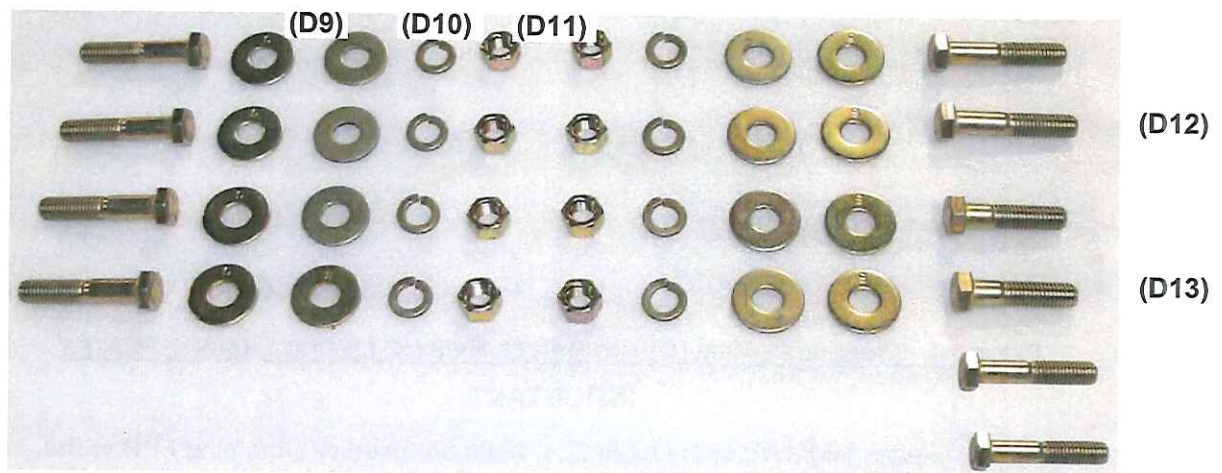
M990 & M1114 BUMPER MOUNTING KIT PARTS, 1/2" DIA.
